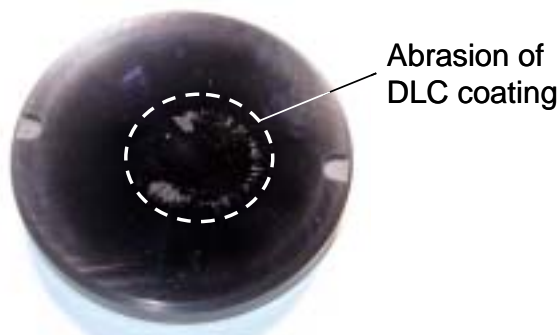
Abrasion of DLC coating on tool surface by compressing of ZK60 at $\Delta h/h_0 = 60\%$ (contacting pressure: 380MPa)
